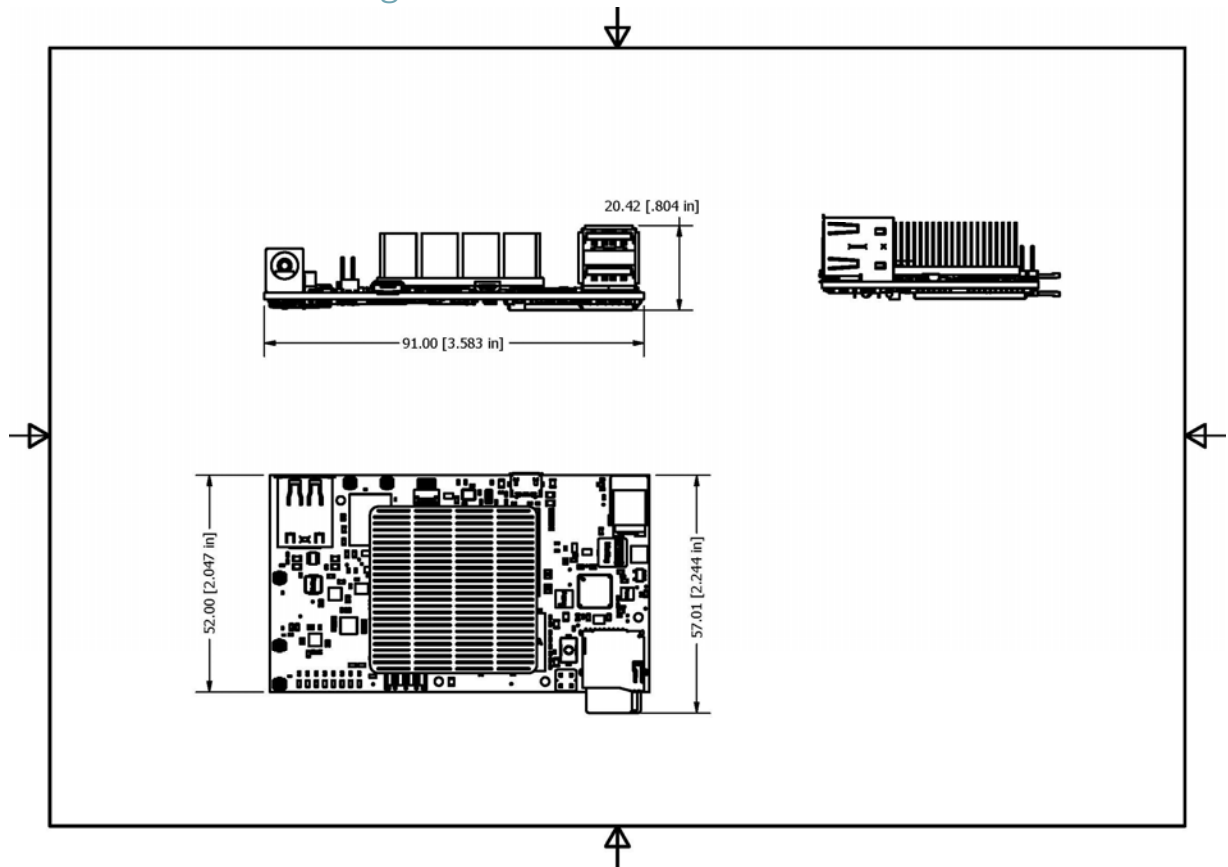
Pixieboard mechanical drawings. Units: mm (in)
